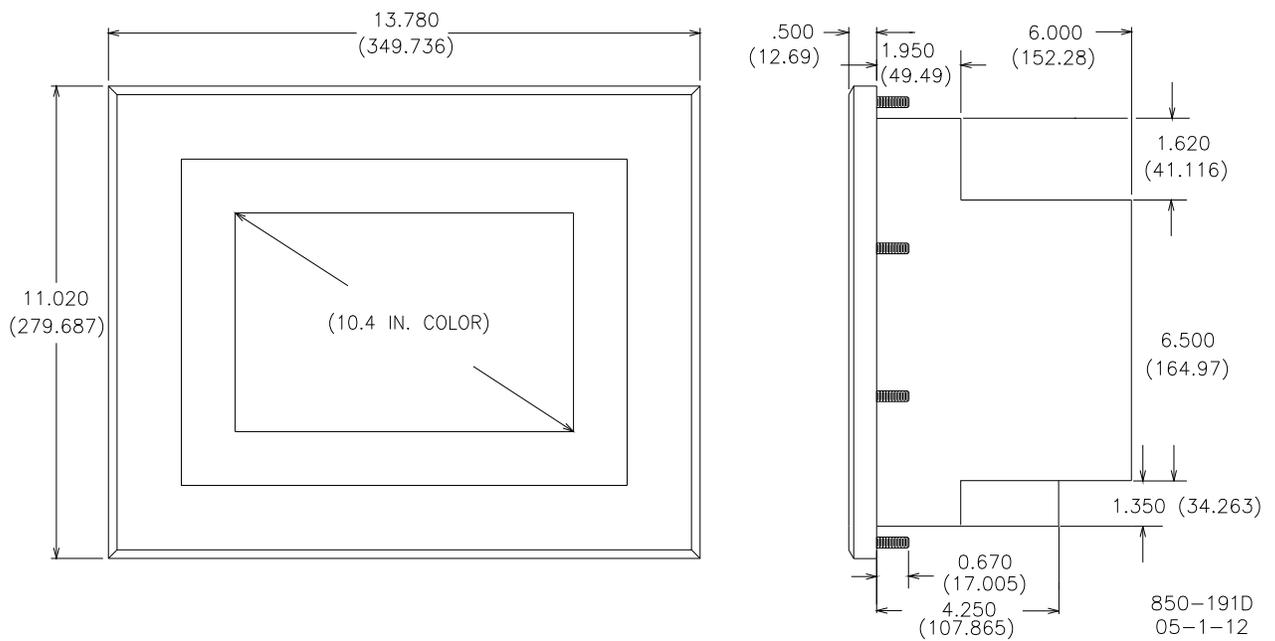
Outside Dimensions (8236-617, 8236-700, & 8236-701)
